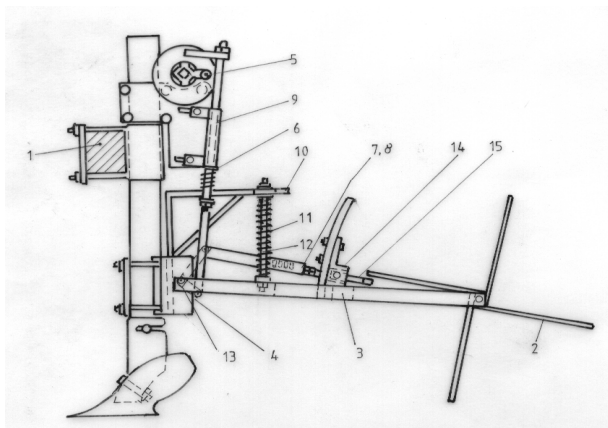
Working section with furrow dividing equipment: 1. Equipment frame for opening watering furrows; 2. Palette rotor; 3. Support arm; 4. Lever system; 5. Turning cam with roll revolving; 6. Spring; 7. Adjusting pipe of the position of palette blocking key; 8. Nut; 9. Guide; 10. Support; 11. Rod; 12. Spring; 13. Joint; 14. Guide; 15. Blocking cam of rotor palettes
